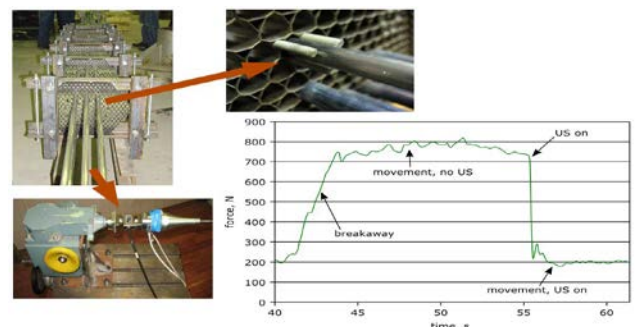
Friction reduction due to ultrasonic treatment while assembling
